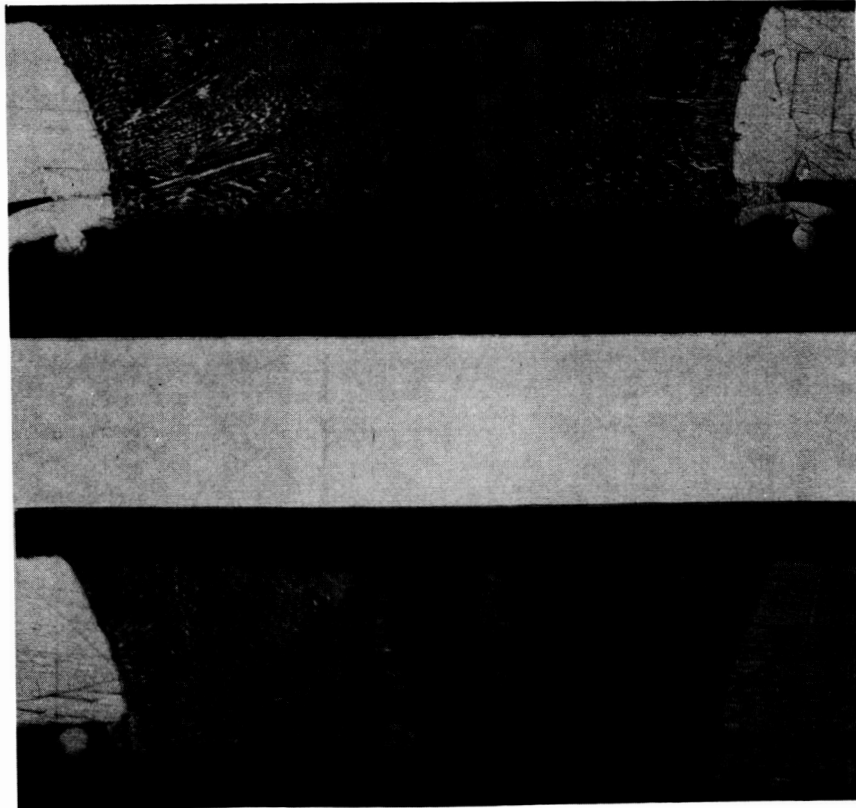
Butt welded (GTAW) face sheets for heat pipe.
